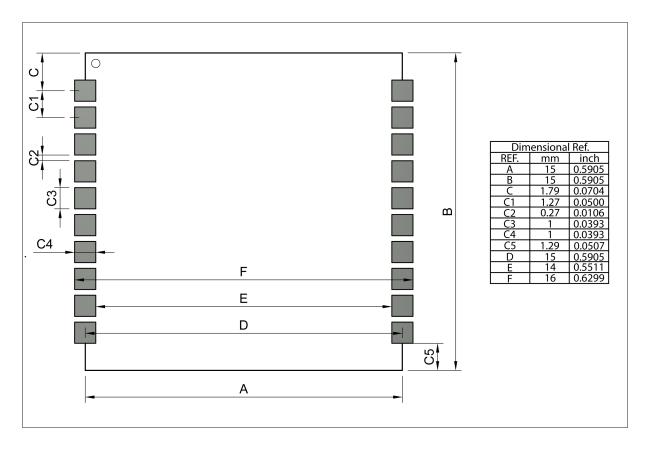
Recommended PCB layout for SM5212-uSMD module (uSMD20 package)
